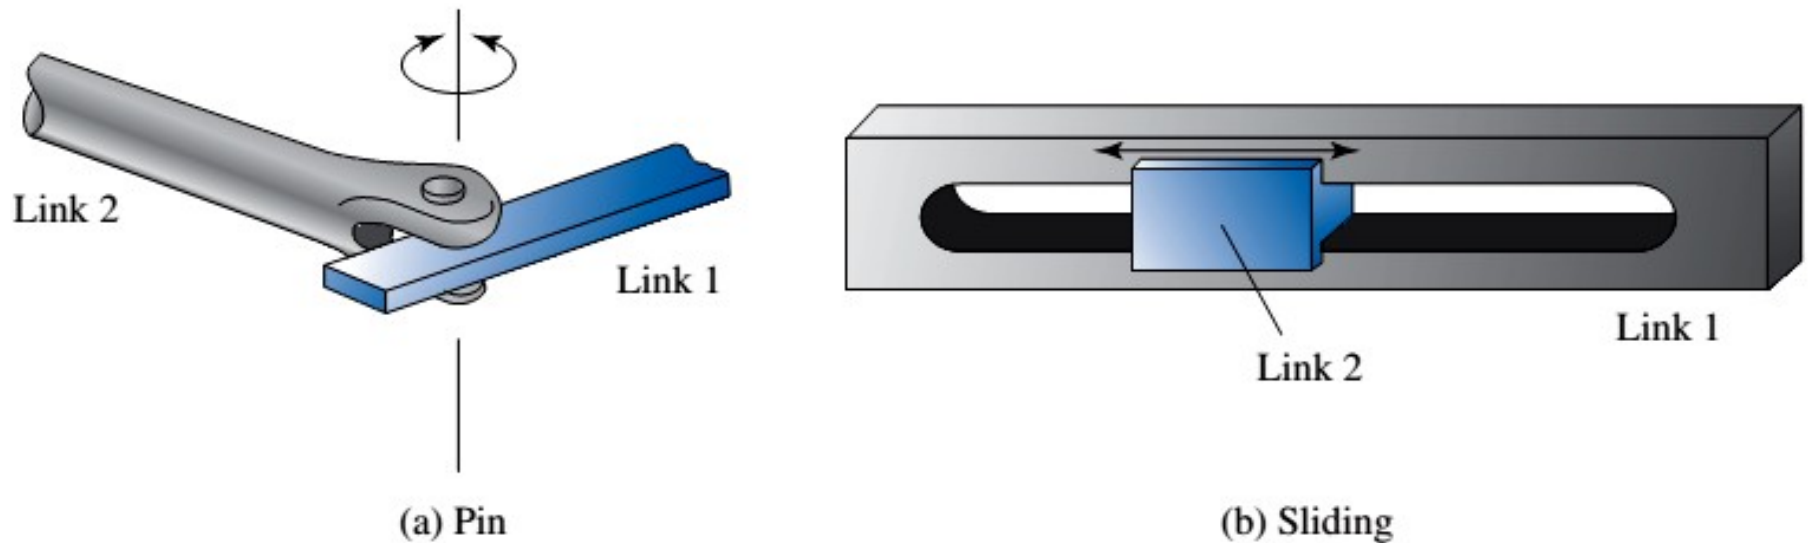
Primary joints: (a) Pin and (b) Sliding.
